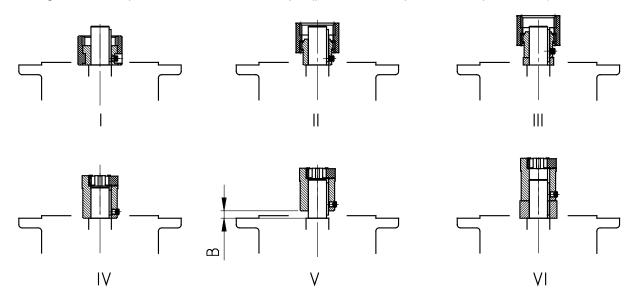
Fitting the coupling onto the motor shaft - various types of coupling
